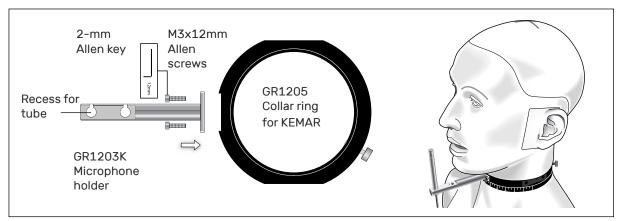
Calibration Jig with Collar Ring and Microphone Holder.
